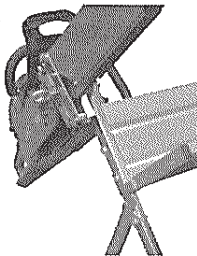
Assemble the guide-bar cover on the top rod. Make sure pins are in place preventing the cover to slide down and get in touch with the chain.
